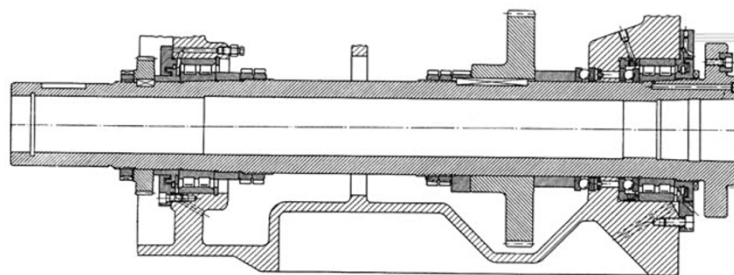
Typical machine tool spindle. (From Koenigsberger, F., *Berechnungen, Konstruktionsgrundlagen und Bauelemente spanender Werkzeugmaschinen*, Springer, Berlin, 1961. With permission.)
